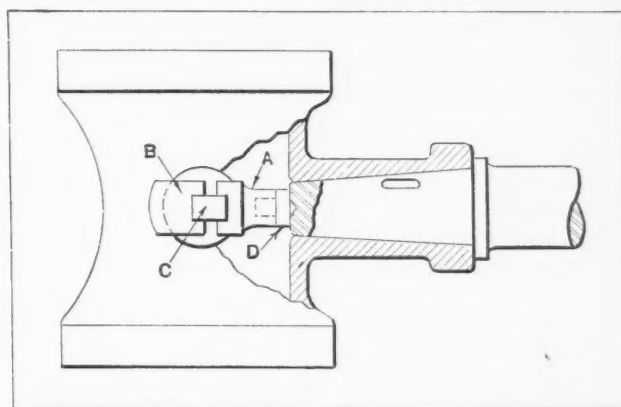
Method of Using Extractor, the Details of which are Shown in Fig. 1
